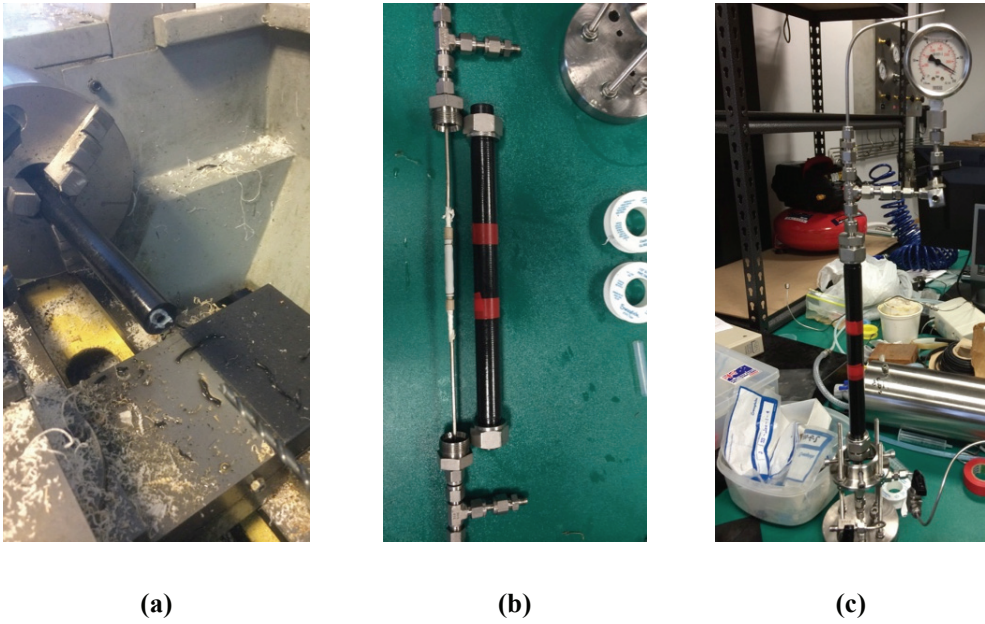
(a) Fabrication of the PEEK tube in the lab; (b) cell assembly: sample inside the white rubber sleeve is connected to flooding lines; (c) hydraulic test outside the micro-CT (confining pressure is 33 MPa, zero pore pressure);
